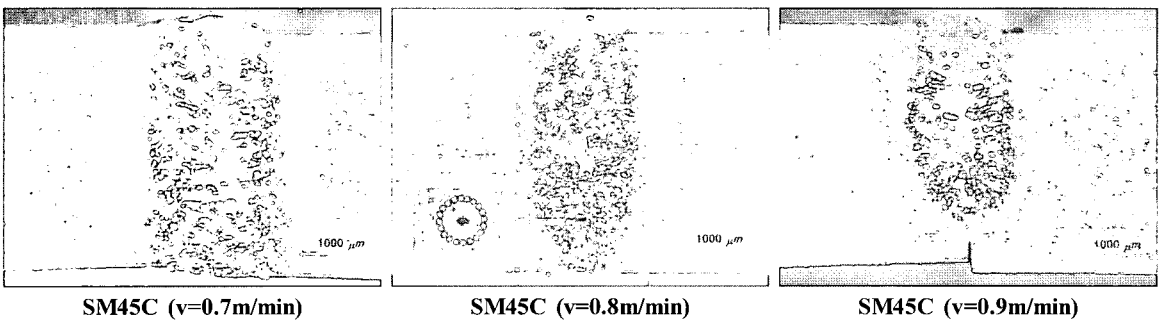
(c) Influence of Welding on the bead shape(SM45C)
